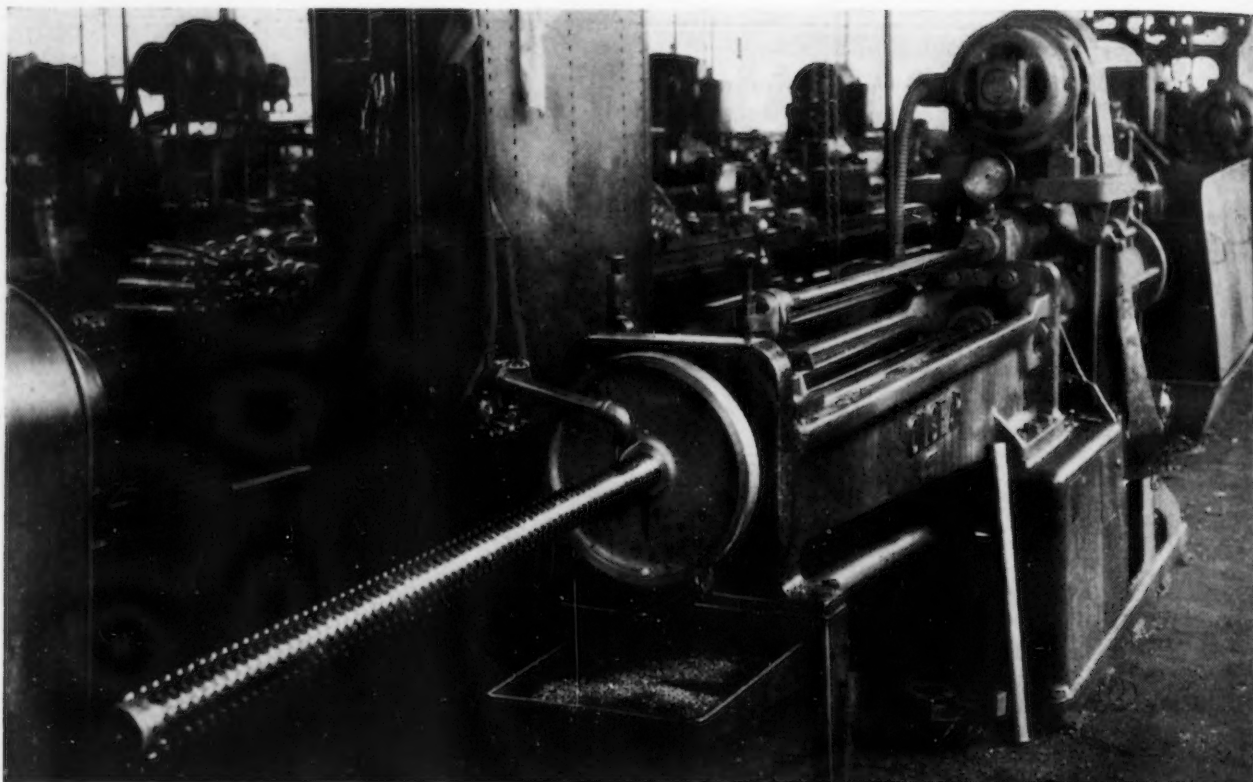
The ten splines in the hole of the gear are accurately and rapidly cut on this broaching machine.
